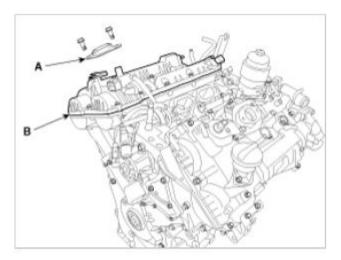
Identifying CVVT Oil Control Valve Cap And RH Cylinder Head Cover Courtesy of HYUNDAI MOTOR AMERICA
